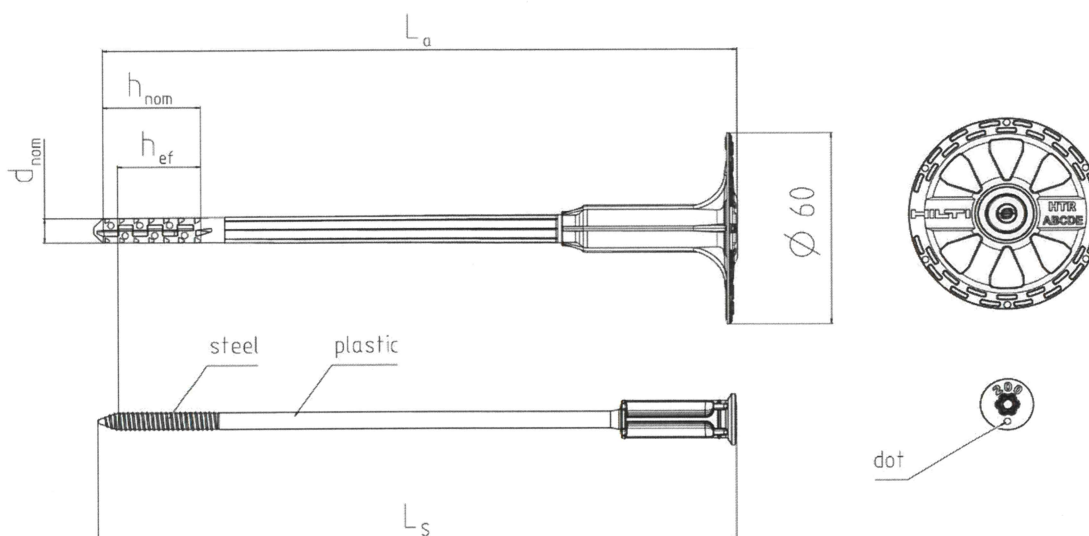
HTR-M - assembled sleeve, plate and composite screw
